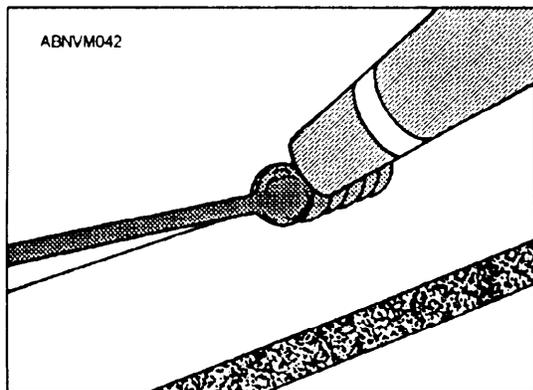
Correct position of the welding torch and proper addition of the filler metal to form a weld pool.
